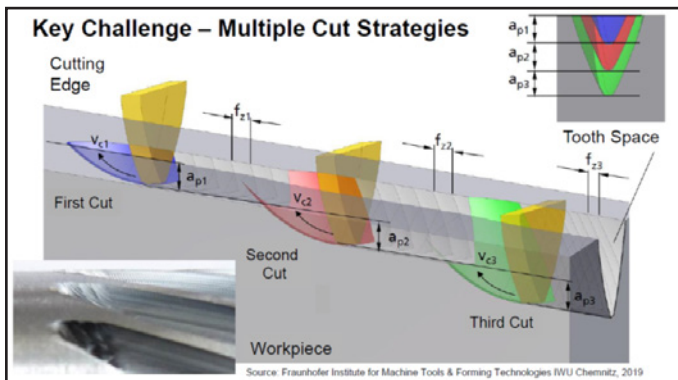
Production of the tooth space on the workpiece using the multi-cut strategy [3] and illustration of the kinematics with sickle-shaped chip formation when rotating the workpiece and tool with crossed axis arrangement (axis cross angle).
